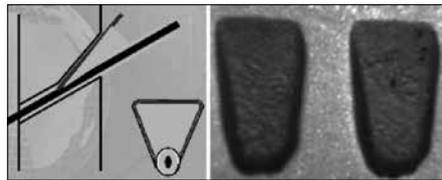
Laser drilled fan shaped holes for improved cooling hole performance. (GSI Group)
